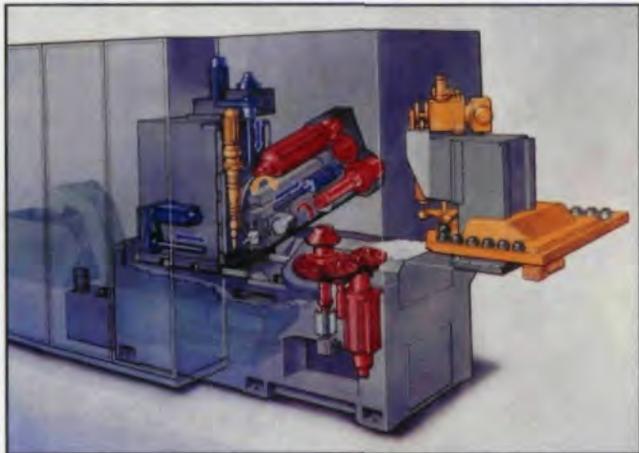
Concept hobbing machine for dry hobbing. Courtesy of Liebherr America. Used with permission.
